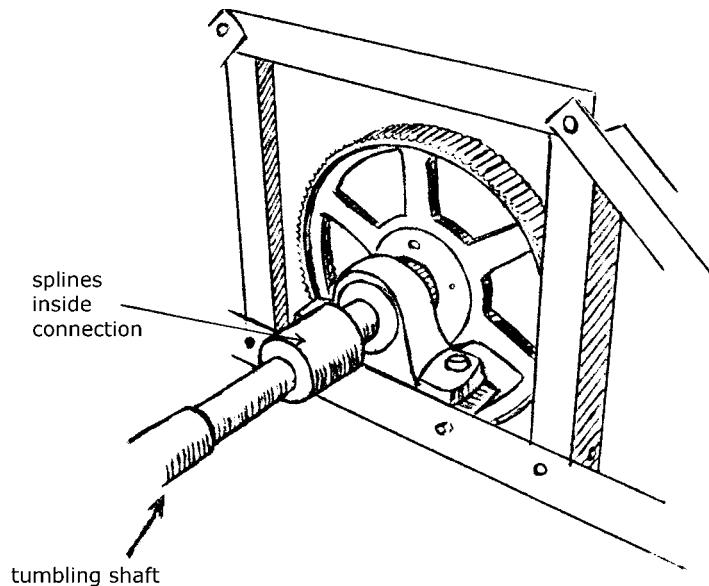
HTD drive sprocket. Bottom shaft is splined and extends outside the frame to hook into the tumbling shaft.
